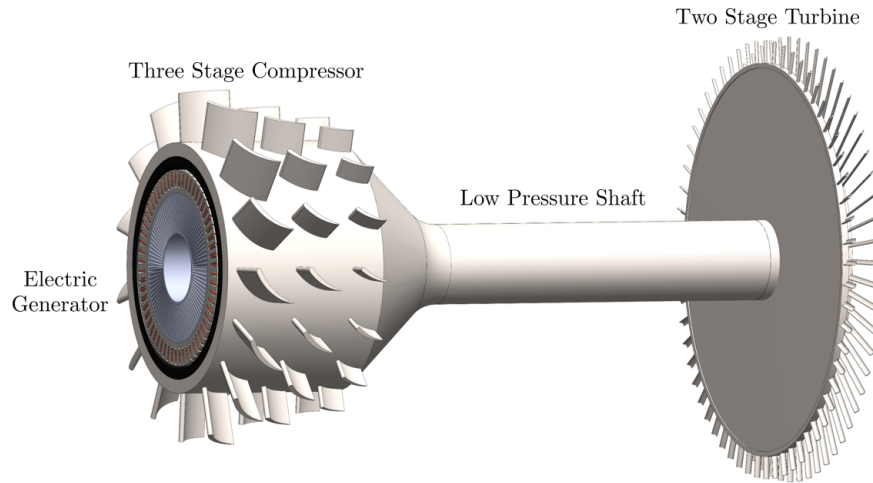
This concept sketch shows the overall layout of the integrated prime mover, but the compressor blades, shaft, and turbine blades are not drawn to scale.
